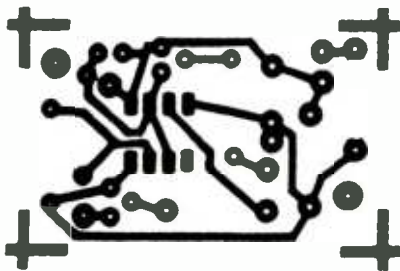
A copy of this full-scale foil pattern can be used to make a circuit board for your fake alarm, but you could also wire-wrap the project without worry.
